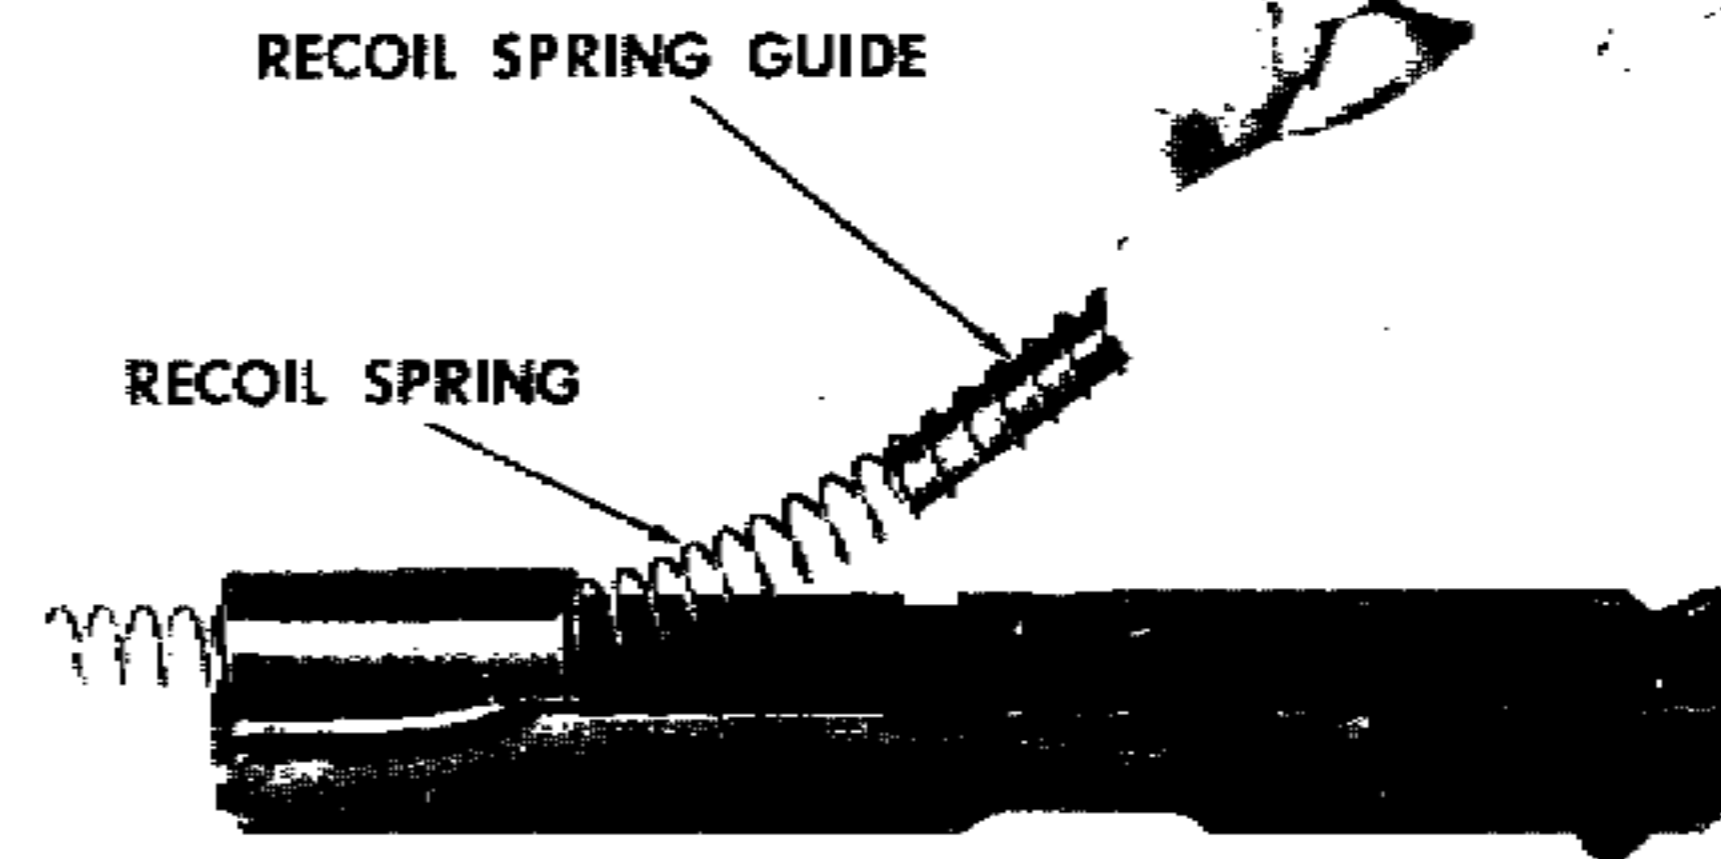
Remove the recoil spring guide and recoil spring. Separate the two parts with a twisting action.
